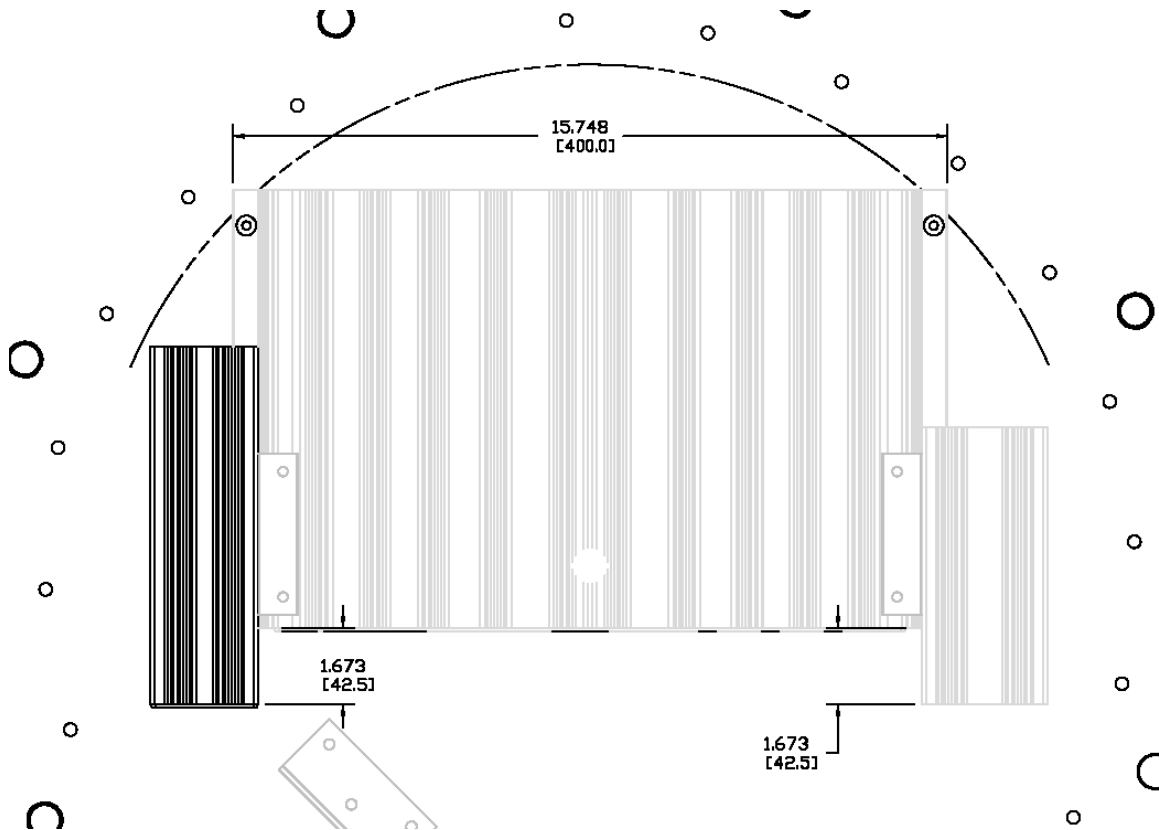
Drawing of enclosure top, showing positioning on the hatch-cover, and location of smallest spacing between dome and electronics enclosure (at solid-dashed line) of over 2 cm.
